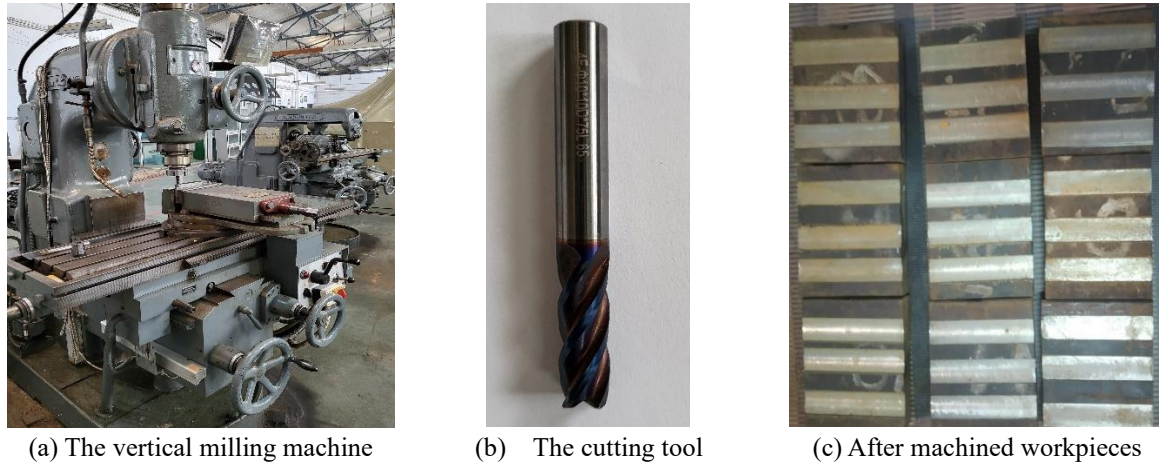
Shows the setup of milling machine along with tool and workpiece
